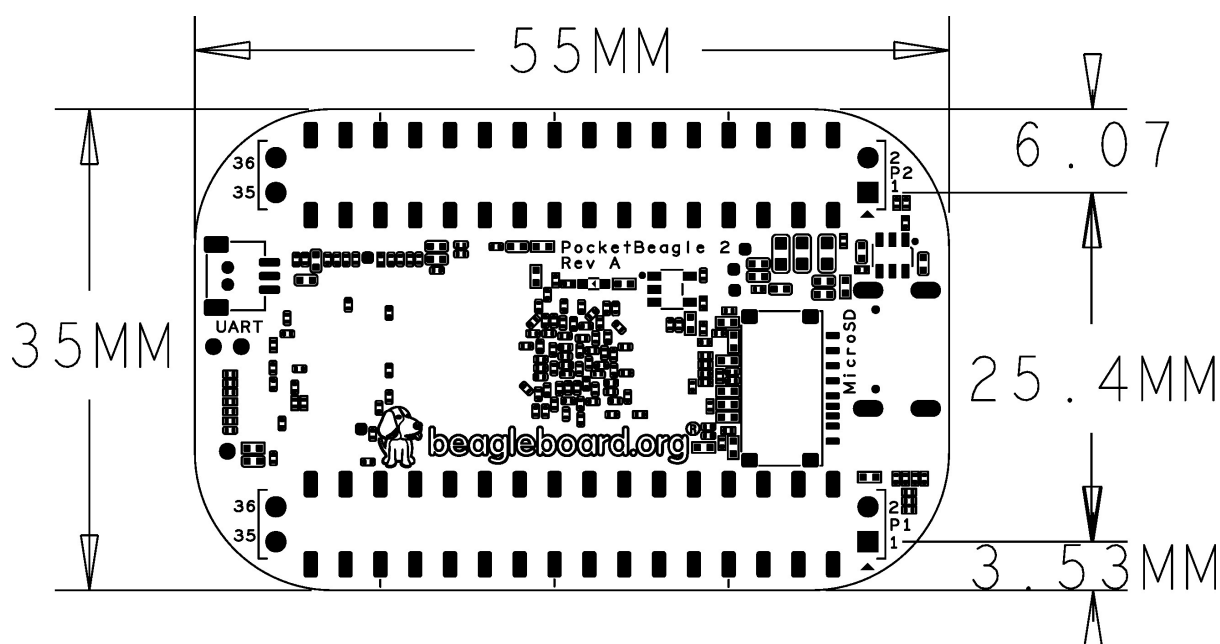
PocketBeagle 2 RevA Dimensions
